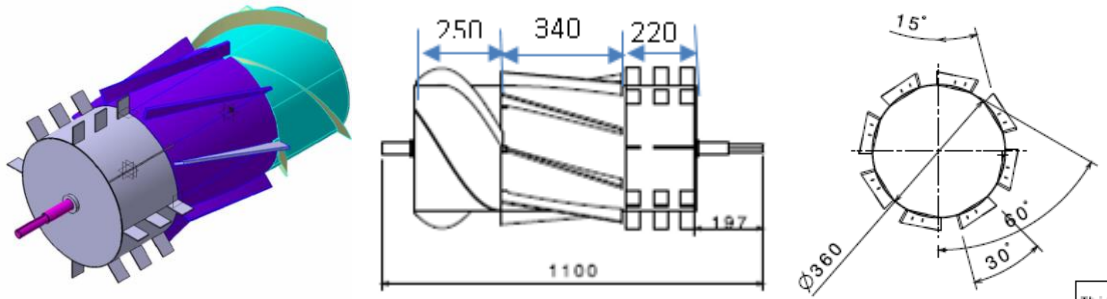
28. The new developed threshing drum with three compartments, design assembly and front view
